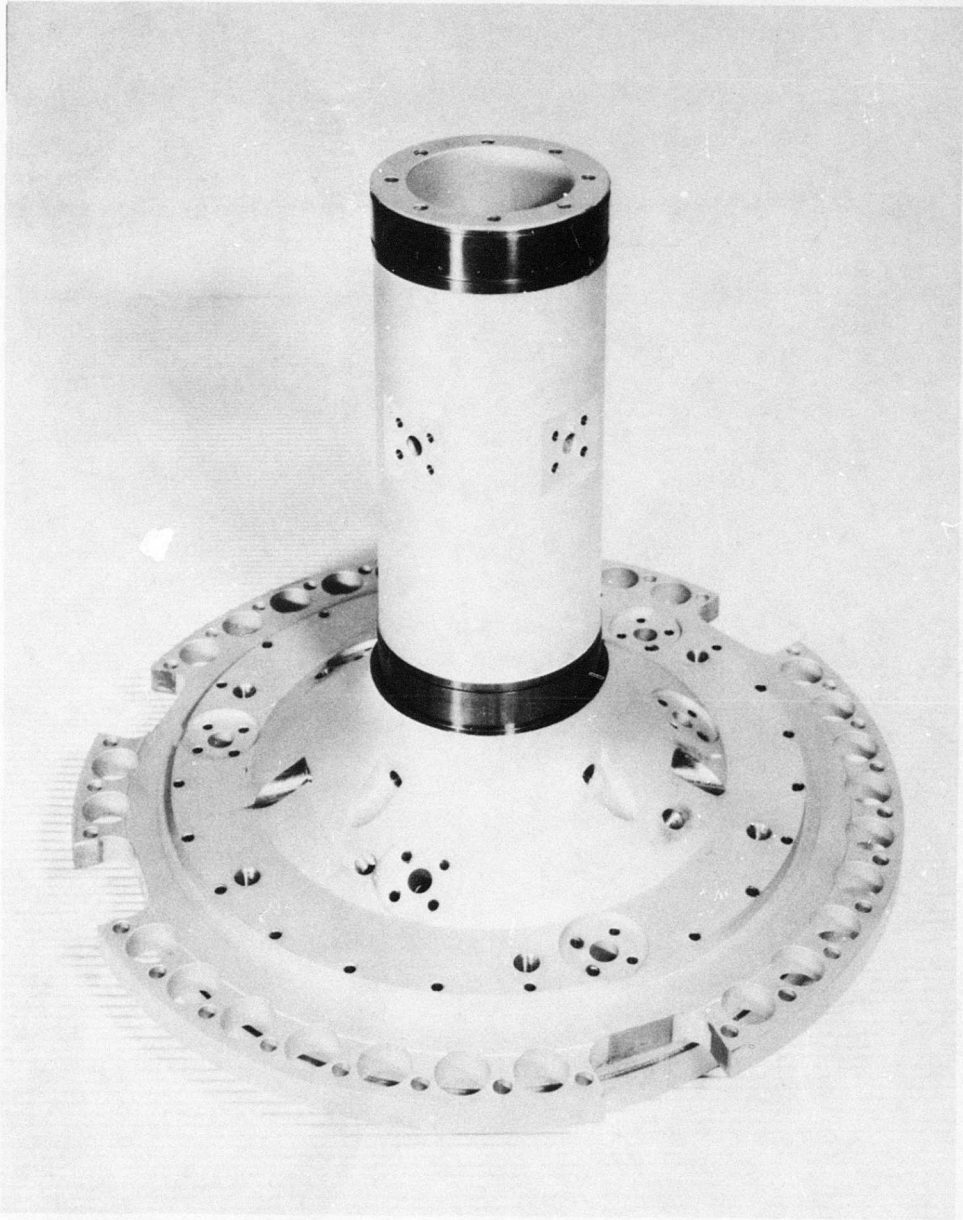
Housing for Supporting High-Speed Main Bearing Shaft.
